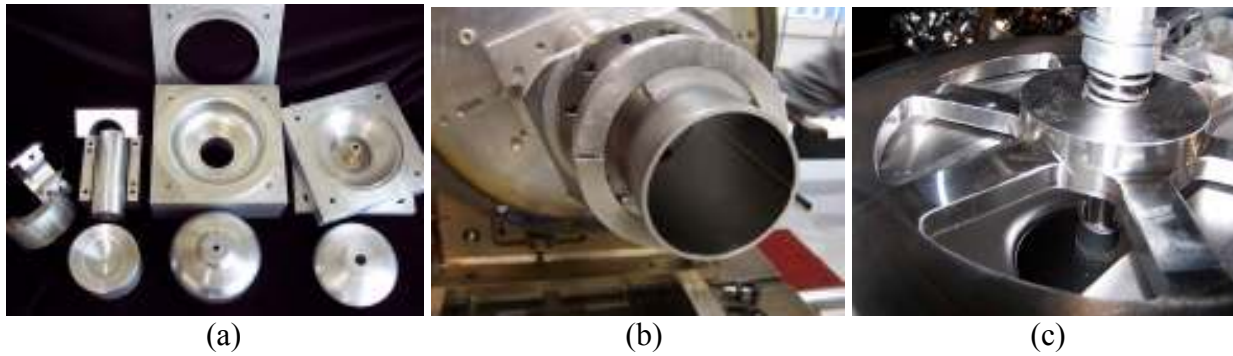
(a) stamping dies and machining fixtures; (b) attachment ring weld fixture; (c) iris weld fixture
